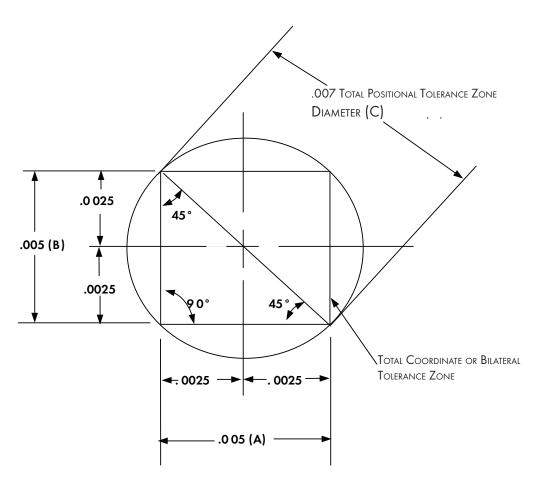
Conversion of positional (cylindrical) tolerance zones to/from coordinate tolerance zones.
